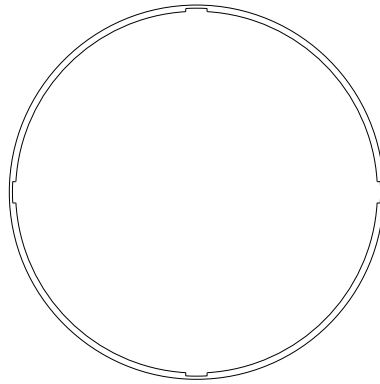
Exaggerated view of effect of steel blades on internal surface of finished specimen
